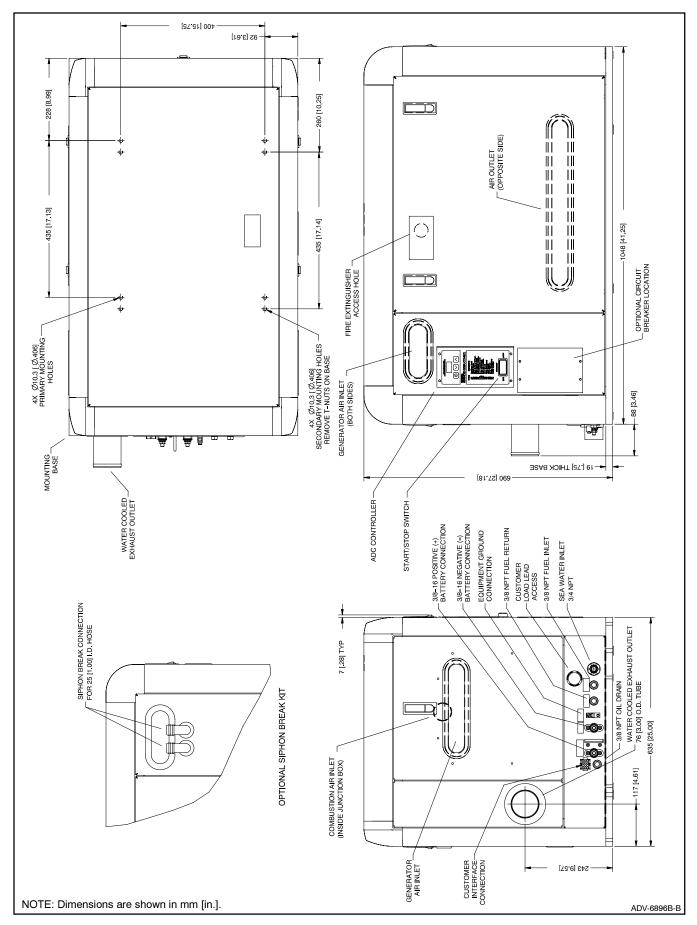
Dimension Drawing, 13EOZD and 11EFOZD with Sound Shield
